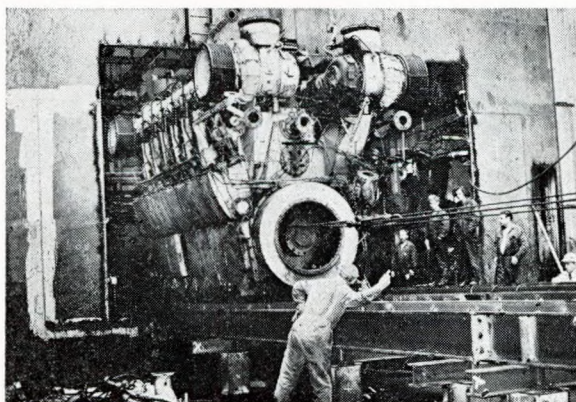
12 cylinder A.O. engine being withdrawn through engine room forward bulkhead into aftermost hold
